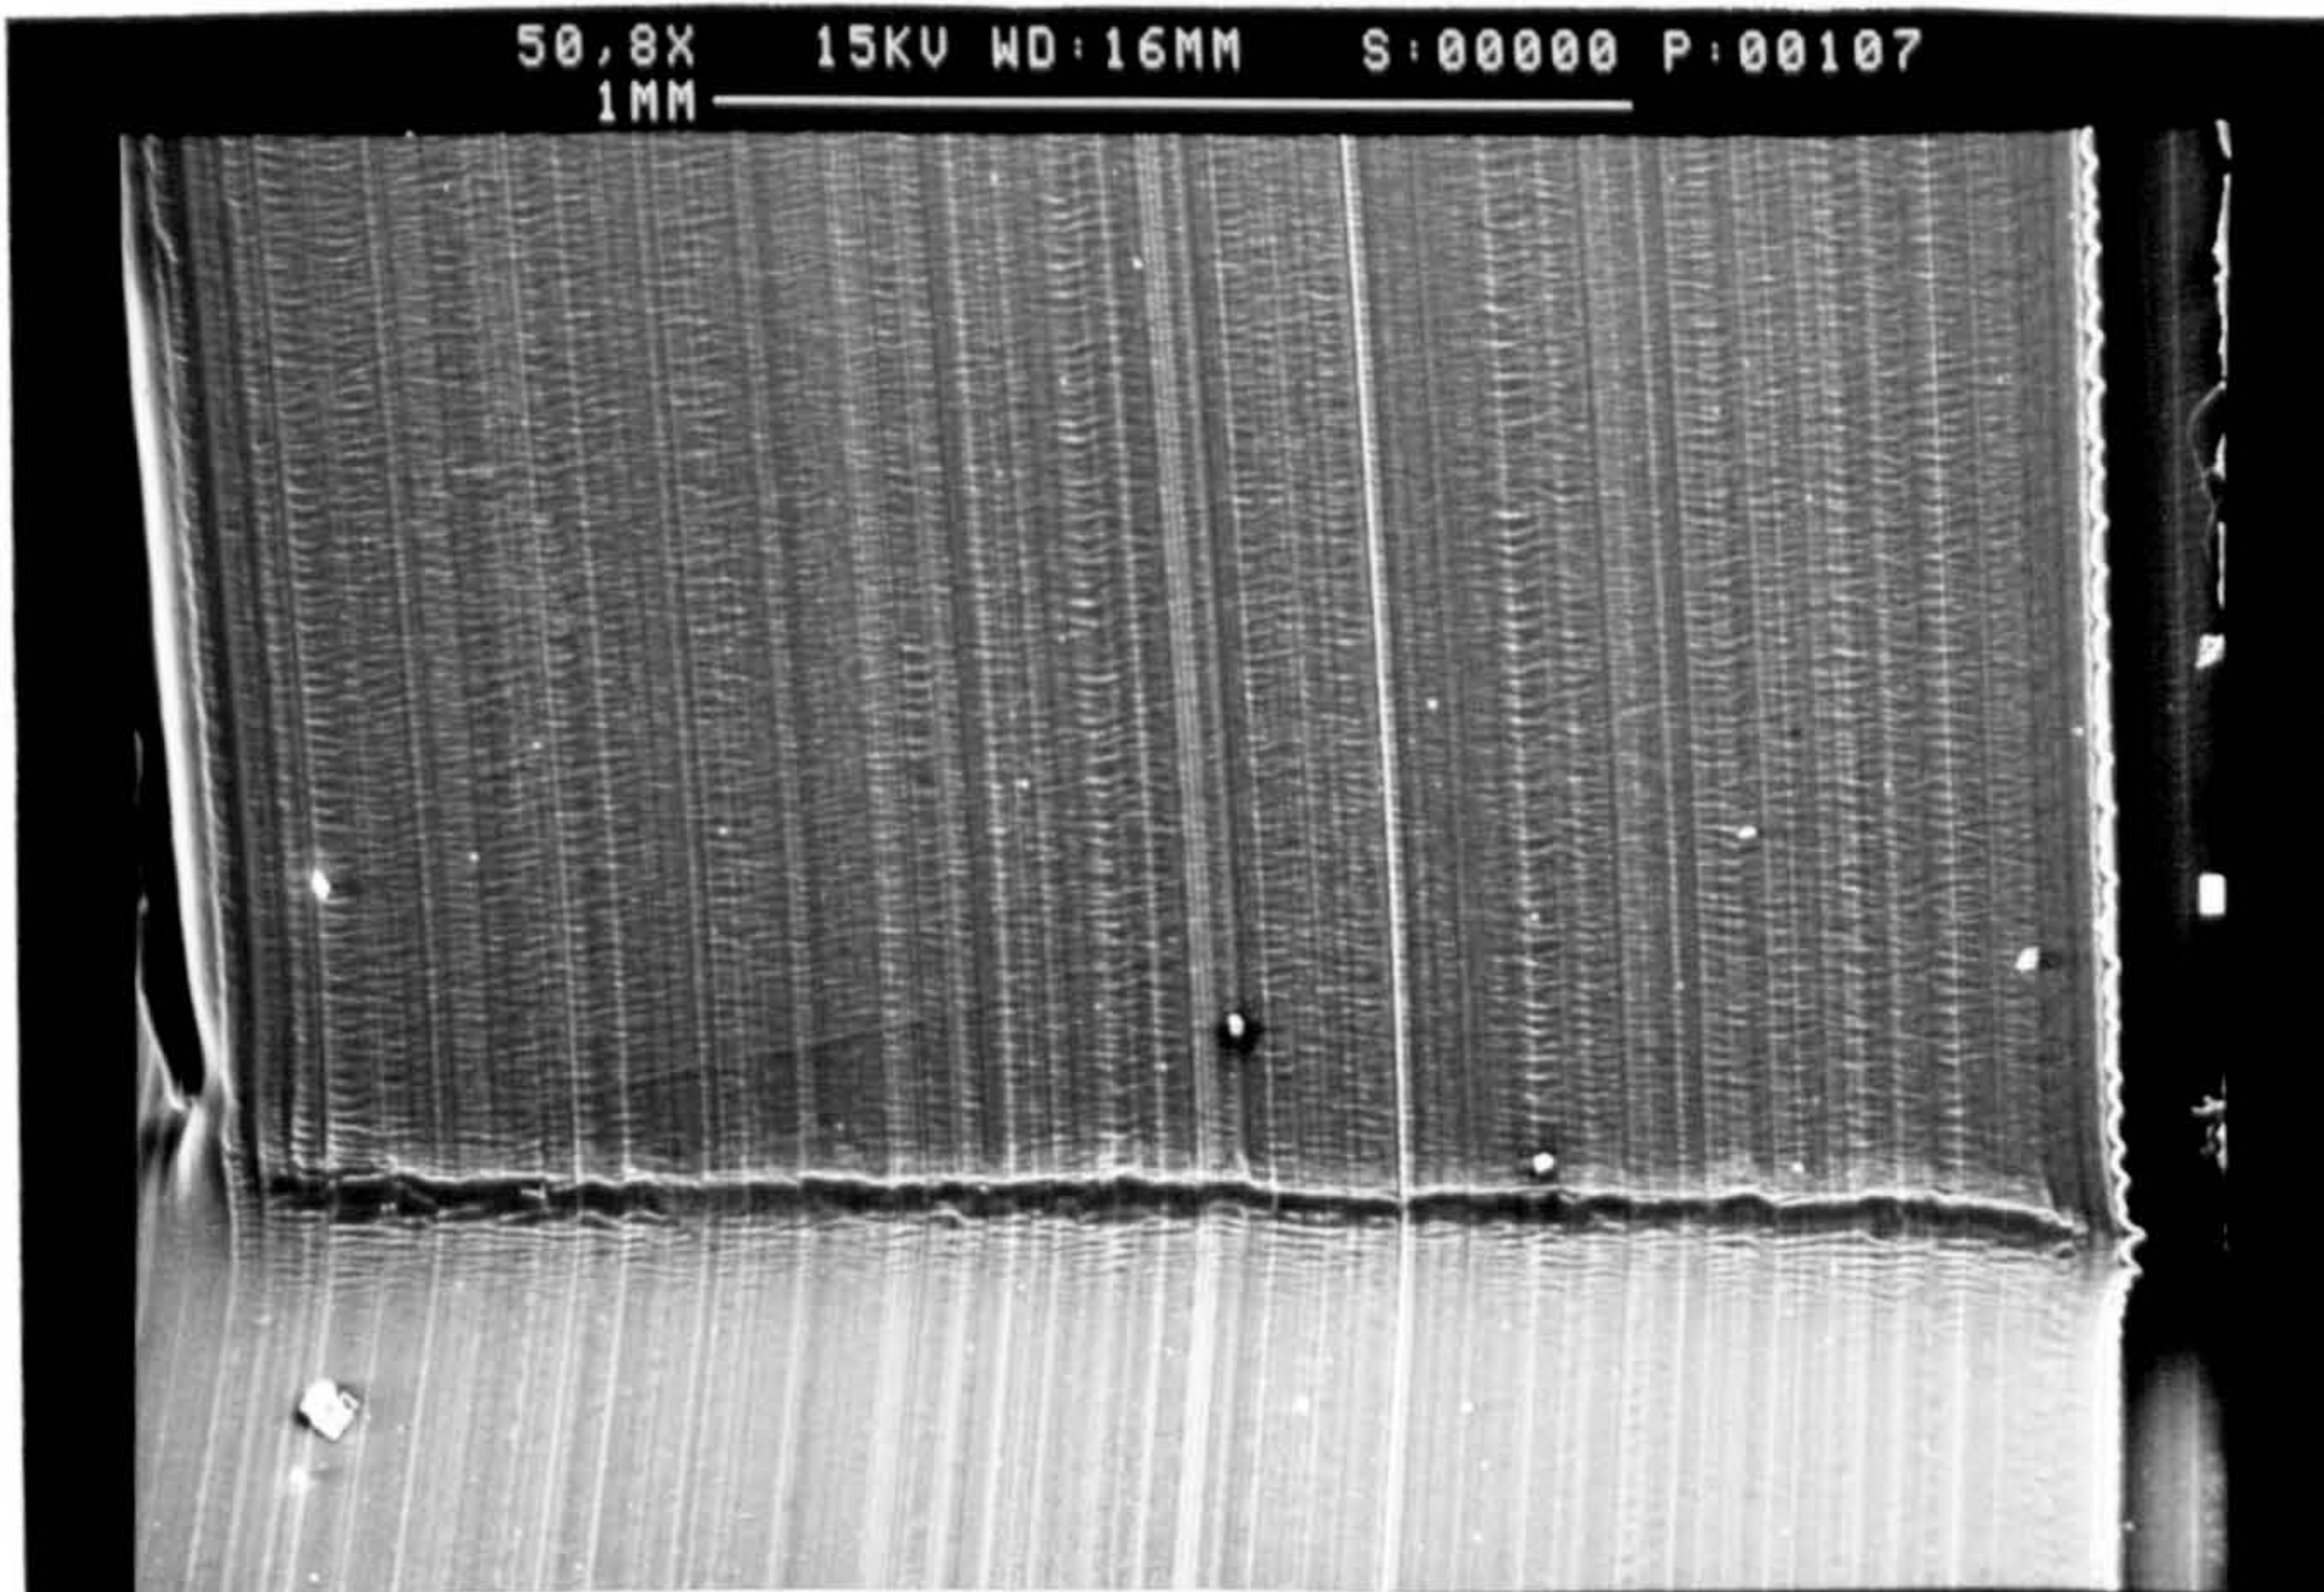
HDPE chip root showing the formation of new shear fronts.
